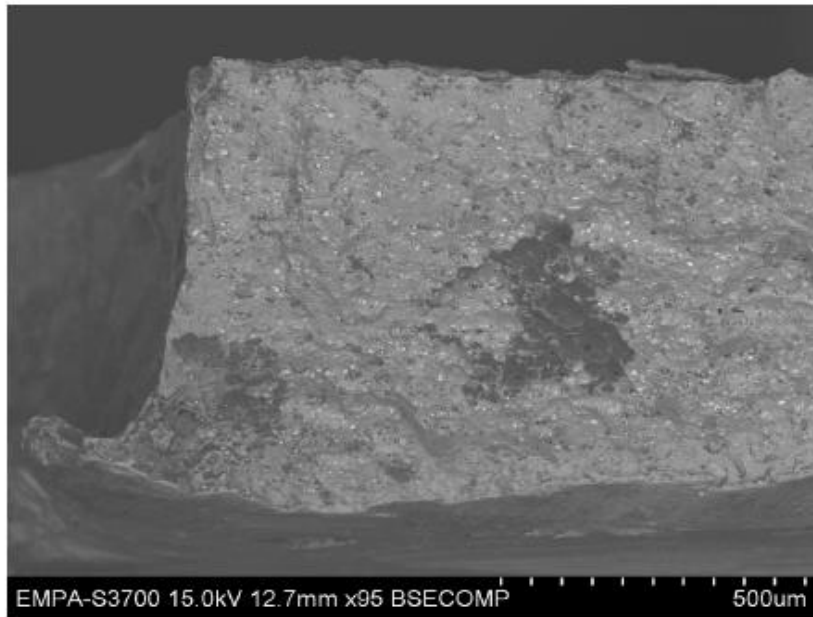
Overview of the fracture surface of sheet no. B at the rivet hole
